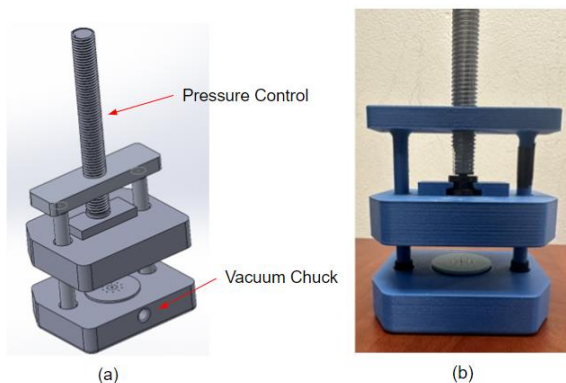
(a): CAD design for new die set with a vacuum chuck base. Figure 3(b): 3-D prototype of the die set.
